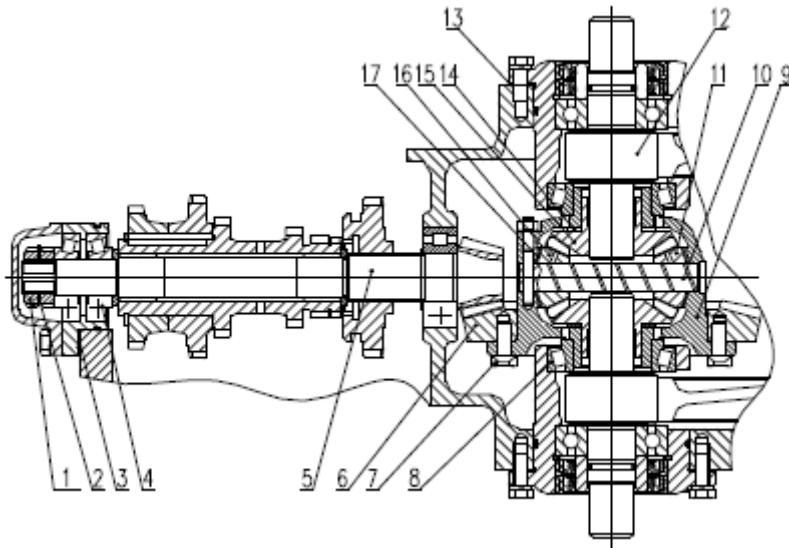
Adjustment of pre-tighten amount of Cone Bearing
